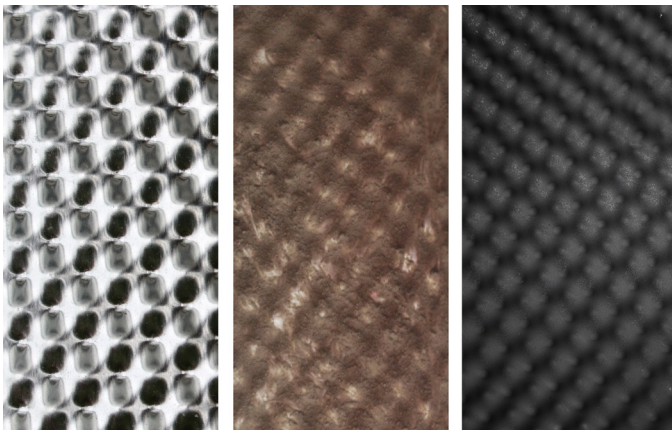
Examined heatshield surfaces: as-received, muddy and black coated
